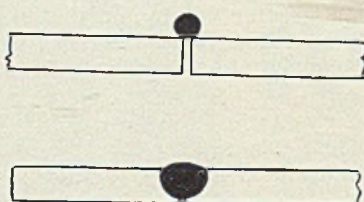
Type of edge weld shown here is extremely economical as no filler metal is needed, yet a strong weld is produced
